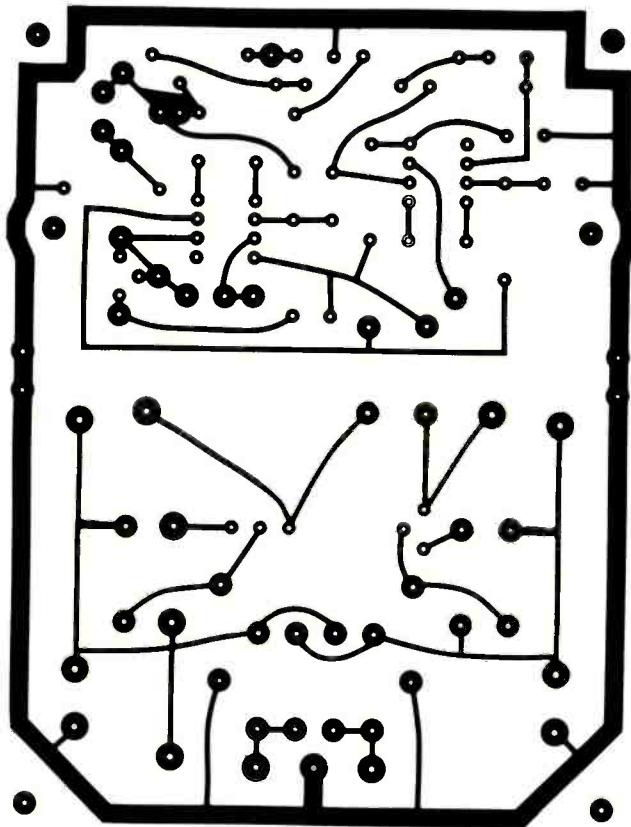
Actual size etching and drilling guide for pc board for the ohms and ac converter is shown at left, components placement above. Board can be separate from power supply if desired.
